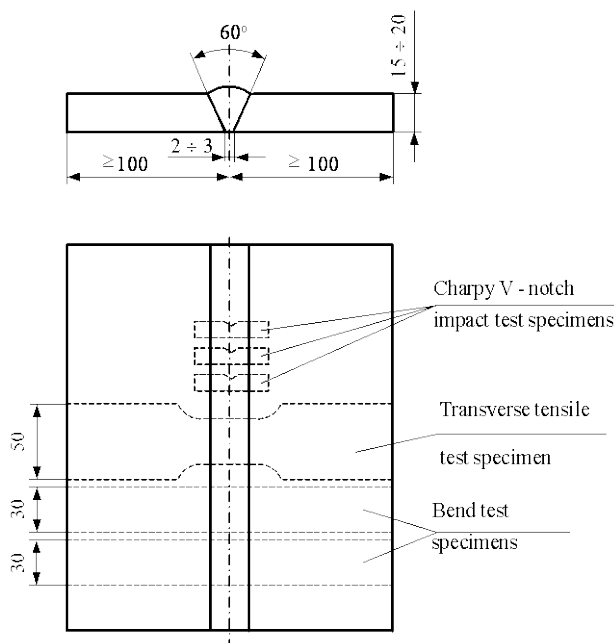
Butt weld test assembly welded manually
